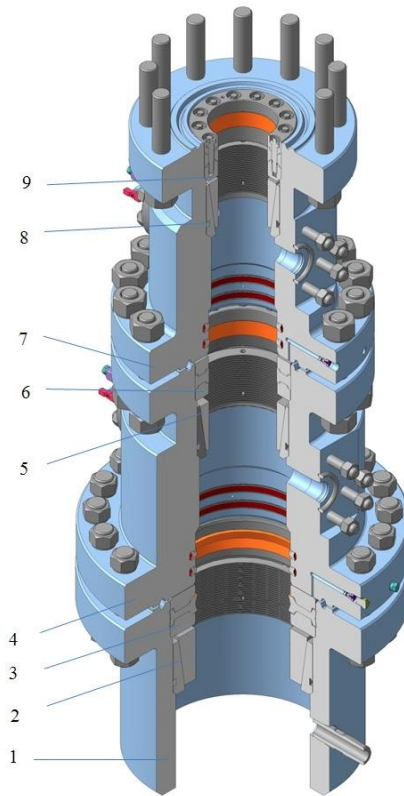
Wellhead: 1 – Casing spool; 2,5,8 – Casing hanger; 3,6,9 – sealing medium; 4,7 – Tubing head.
